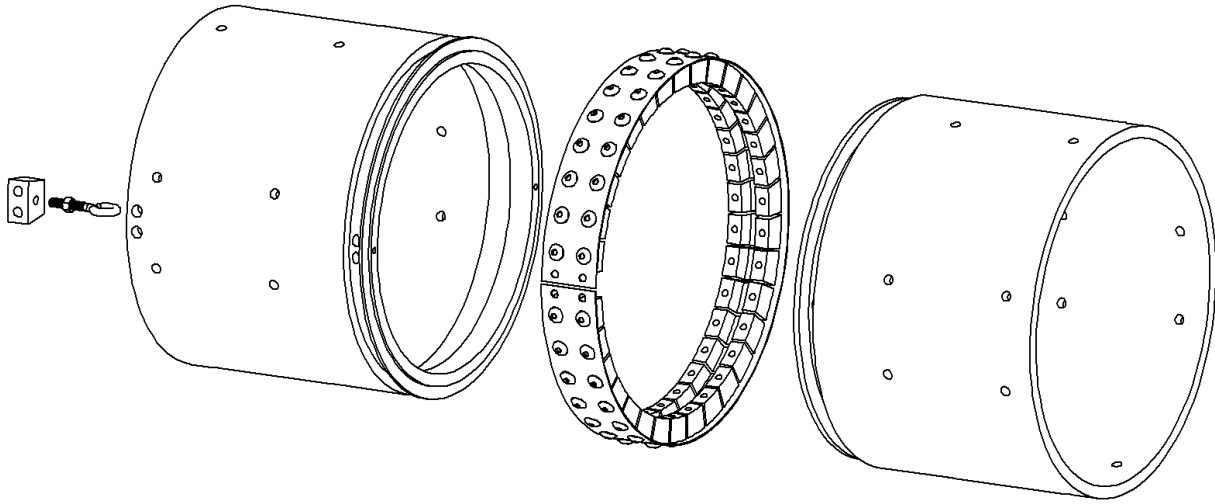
Exploded view of final mechanical staging system design, from left to right: eyebolt mounting block and eyebolt, lower flange, clamp band assembly, upper flange.
